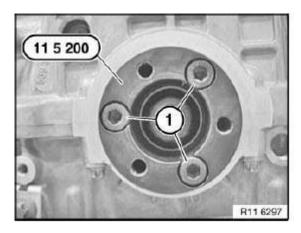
Identifying Special Tool 11 5 200 And Screws Courtesy of BMW OF NORTH AMERICA, INC.
